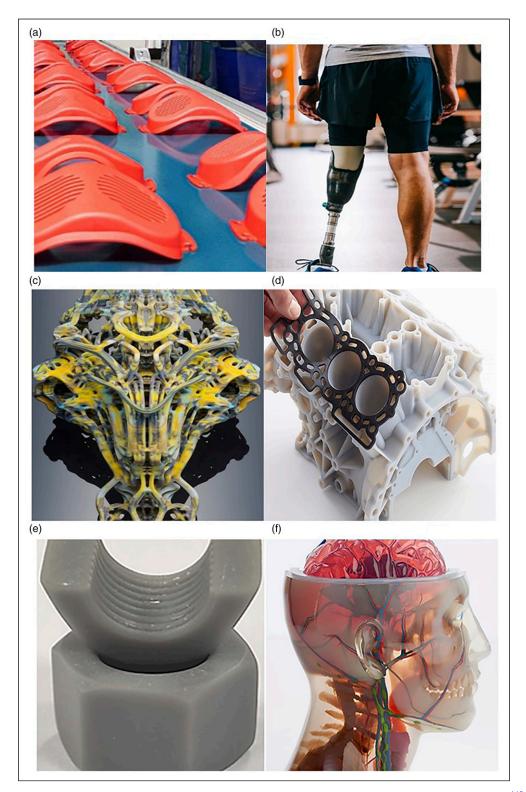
Multi-material 3D printed industrial products using polyjet technology: (a) 3D printed COVID-19 face masks, ¹⁶³ (b) prosthetic leg implant, ¹⁶⁴ (c) polyjet-printed wolfkiam, ¹⁶⁵ (d) polyjet-fabricated engine block, ¹⁶⁸ (e) polyjet-fabricated M8 nut, and (f) vascular anatomical AM model. ¹⁶⁹
